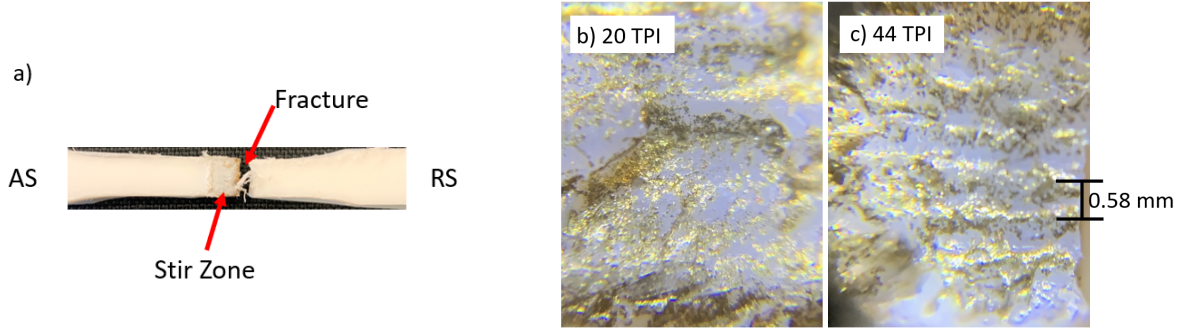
a) Fractured tensile specimen. b) Coarse thread fracture surface. c) Fine thread fracture surface. Surfaces are coated with gold paint to show texture. Scale shows fracture surface has spacing of the thread pitch.
